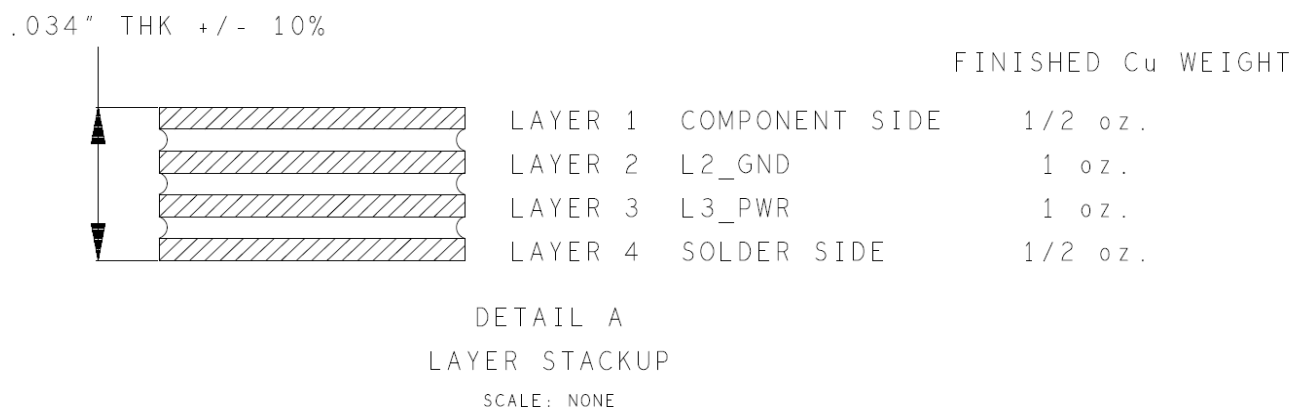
MKW01 PCB Stackup Cross-Section (Four Layer)
